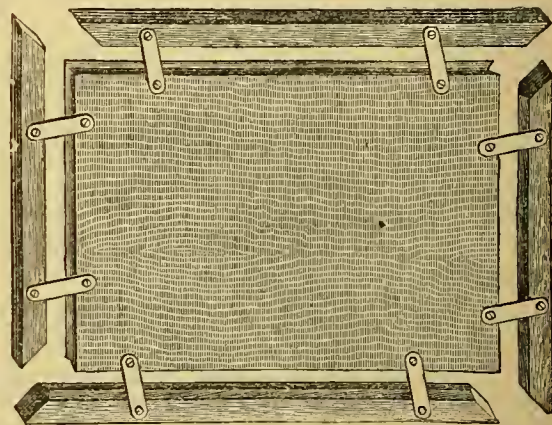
THE BOARD OPEN, SHOWING BACK OF BOARD.
